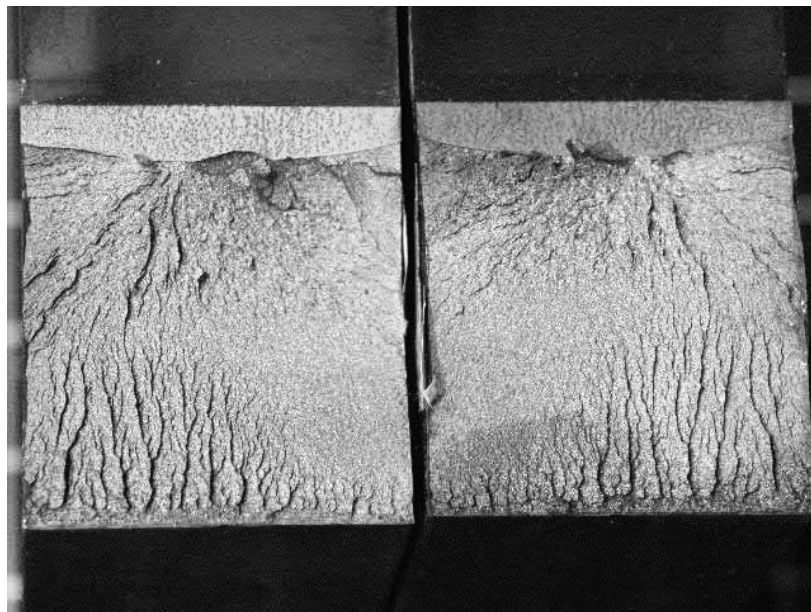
Fracture Surface of Specimen HPS(HT)-FT-3
